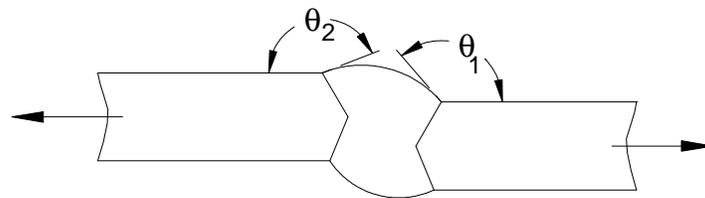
Butt-Welded Plate Weld Toe Angle - Variables
